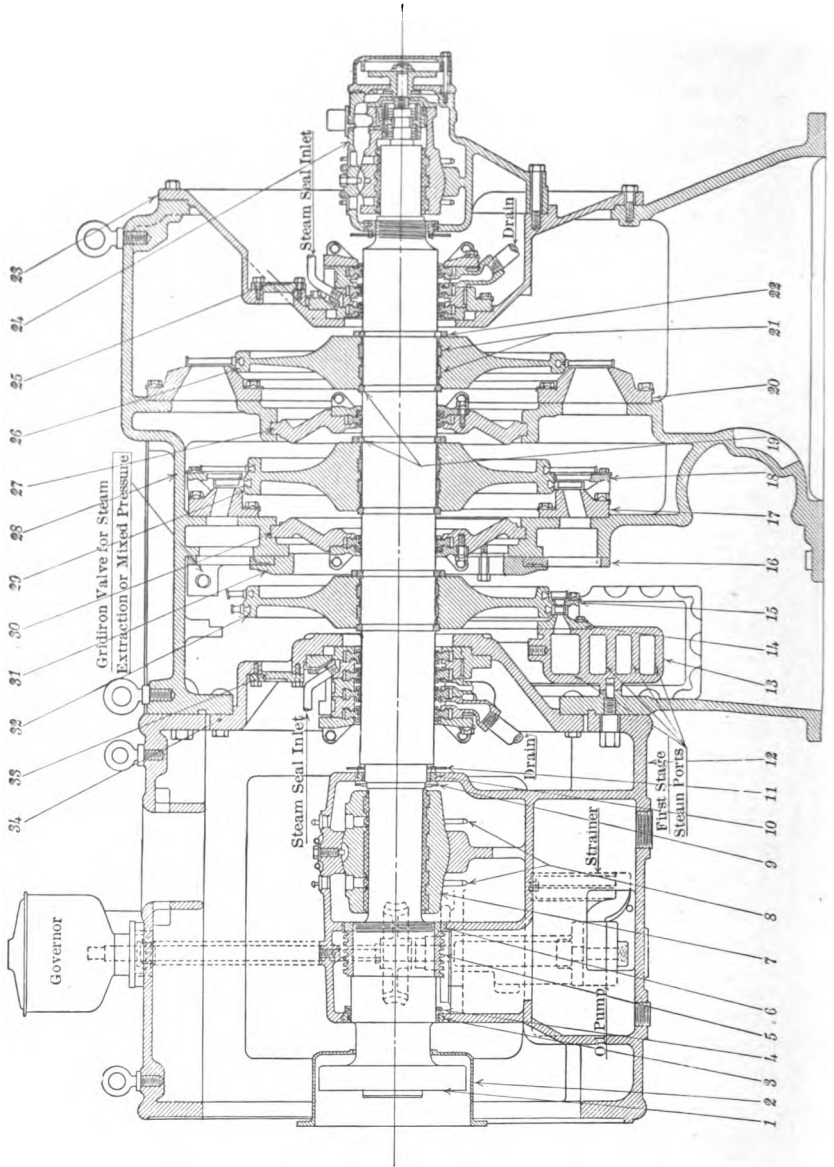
ASSEMBLY OF THREE-STAGE 1,000-KW. TO 2,500-KW., 3,600-R.P.M. CURTIS RIGID FRAME STEAM TURBINE
